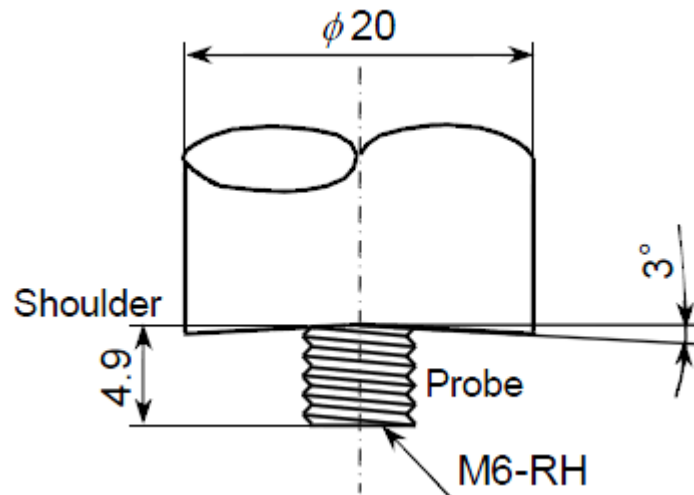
Tool design for AA6061-T6 4.95 mm plate^[12]
